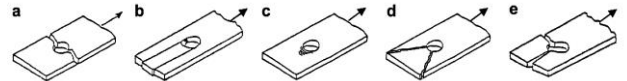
Bearing test failure modes for ASTM D 5961/D 5961M-05: (a) lateral (net-tension), (b) shear-out, (c) bearing, (d) tear out, and (e) cleavage [19]
